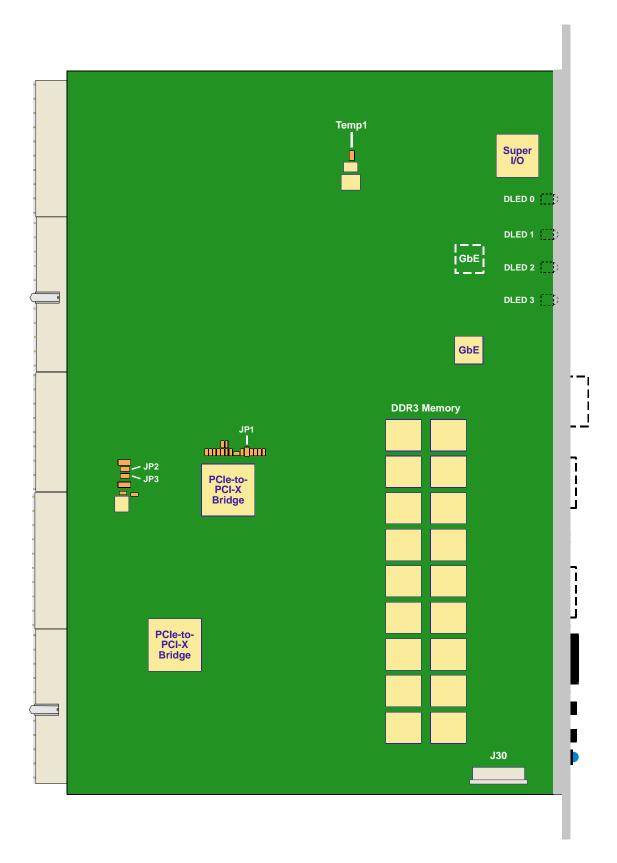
CP6002-R2-MC Board Layout – Top View
